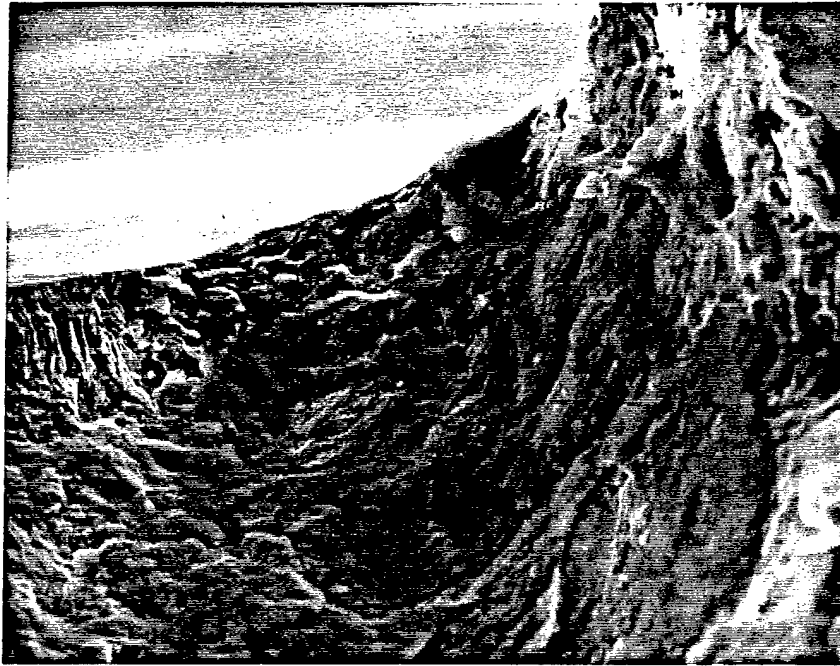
Detail of Origin Located on the Fracture Surface of PUR Rod -174 (Mag. 750x).
